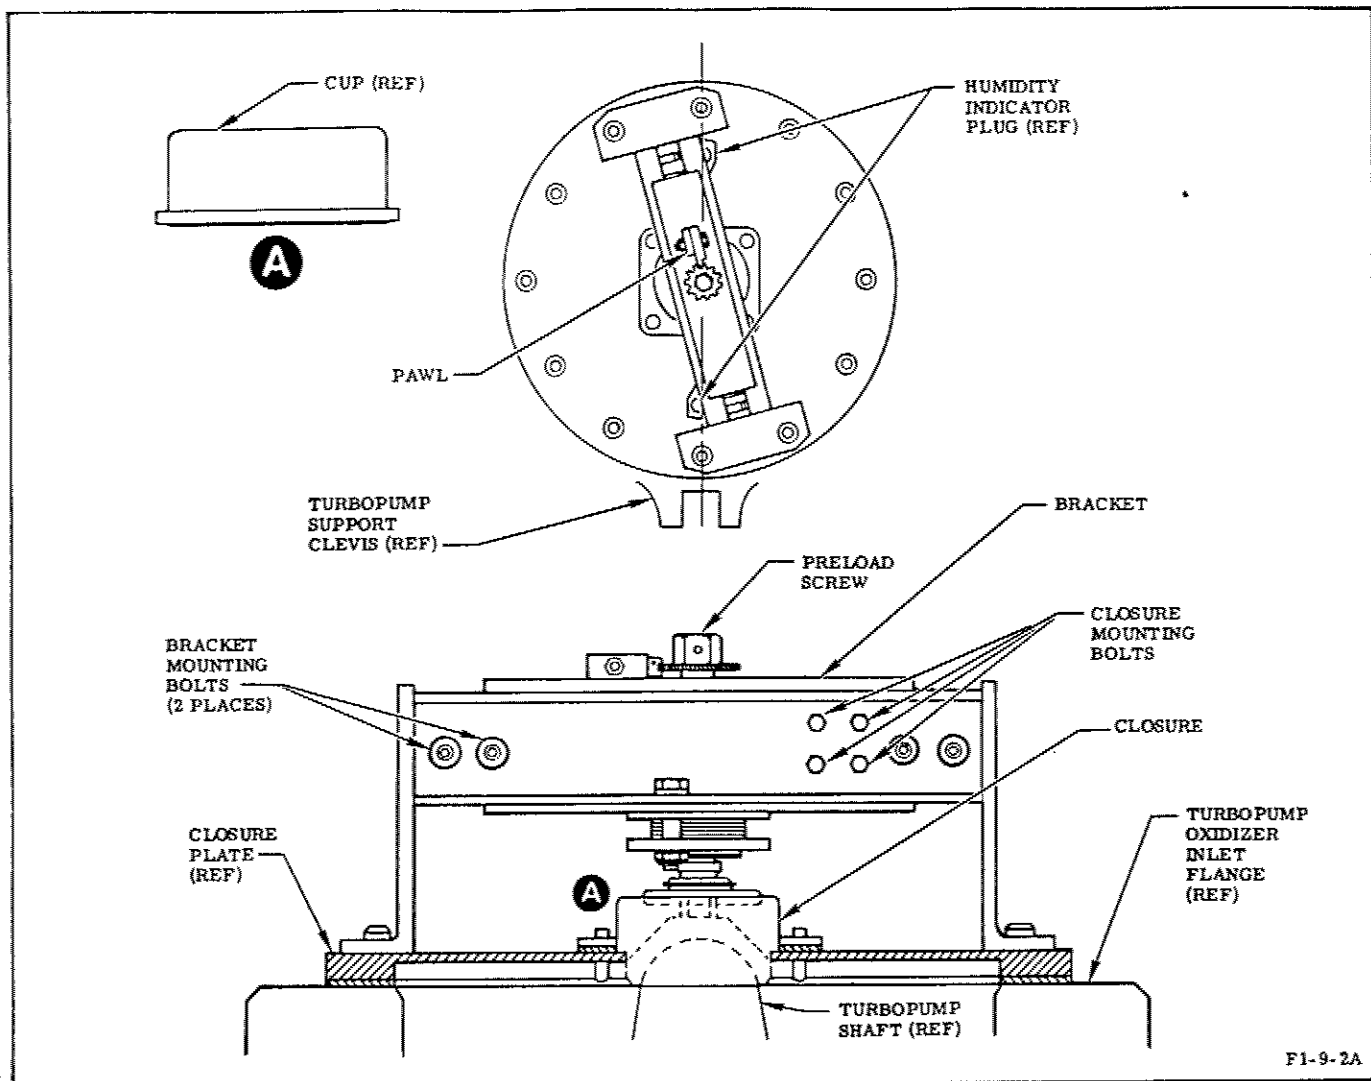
Installing Turbopump Shaft Preload Fixture
